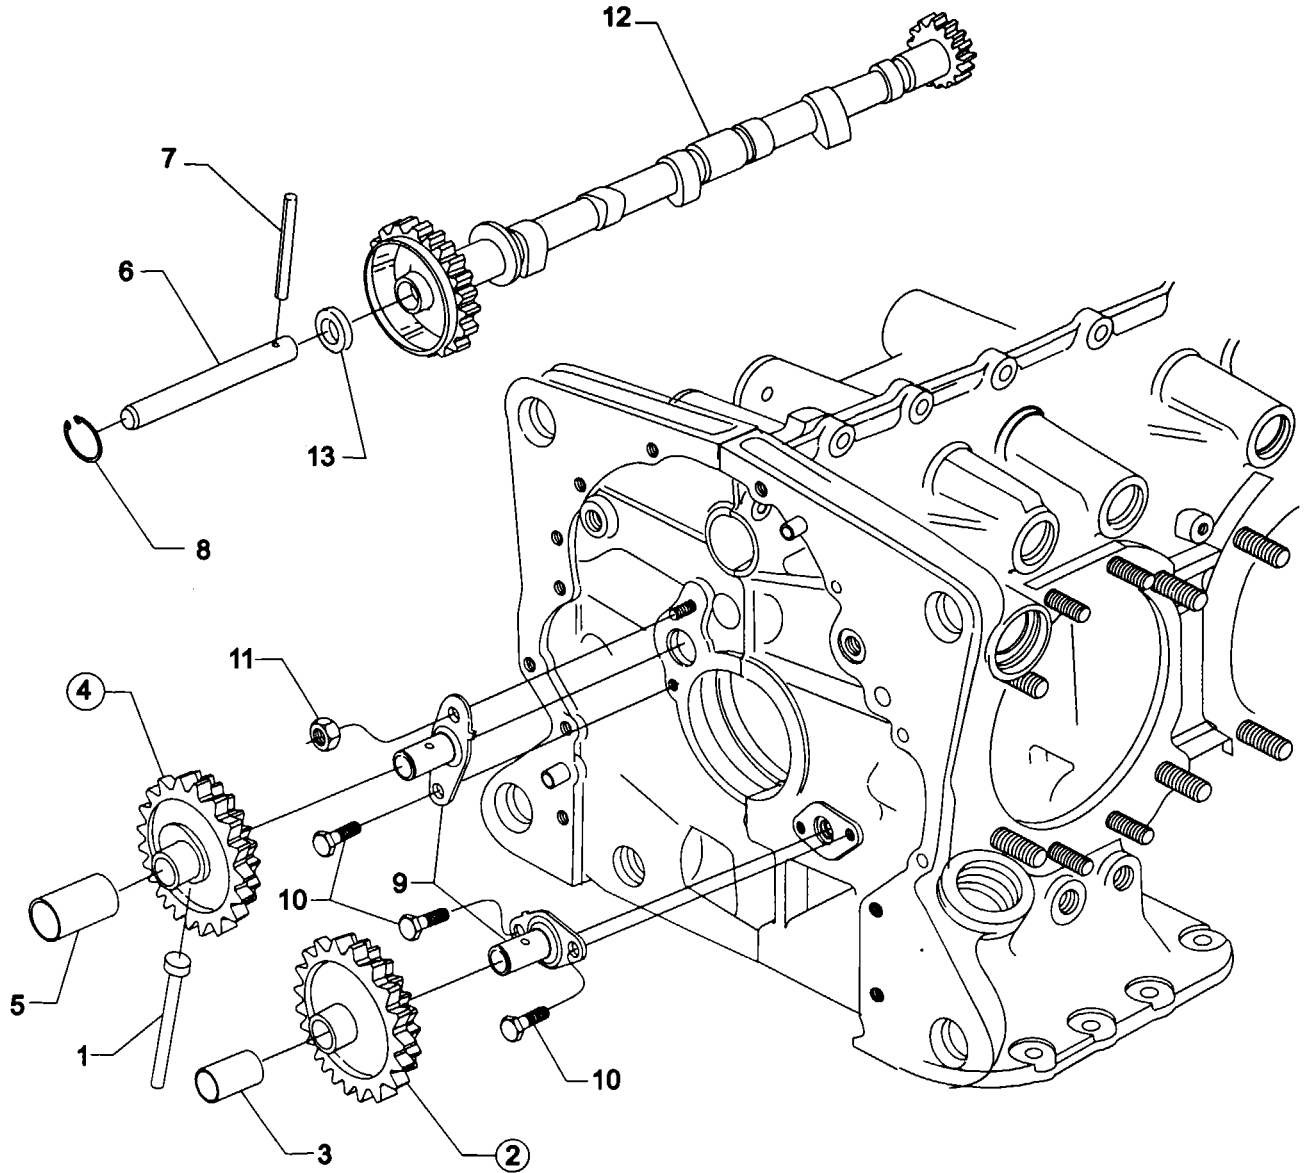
CRANKSHAFT IDLER GEARS, TACHOMETER DRIVE AND CAMSHAFT
